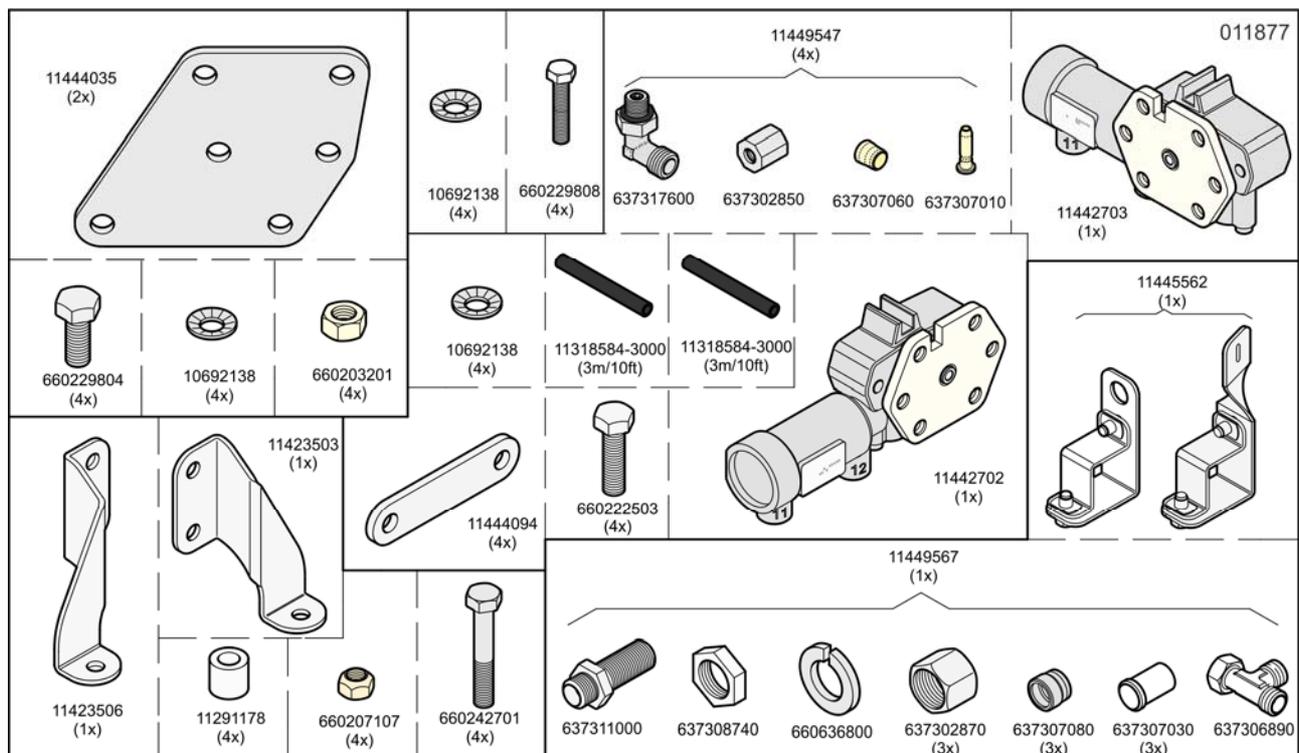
Van Hool kit 11447626 (to modify trailing axle of 10-wheeler)
